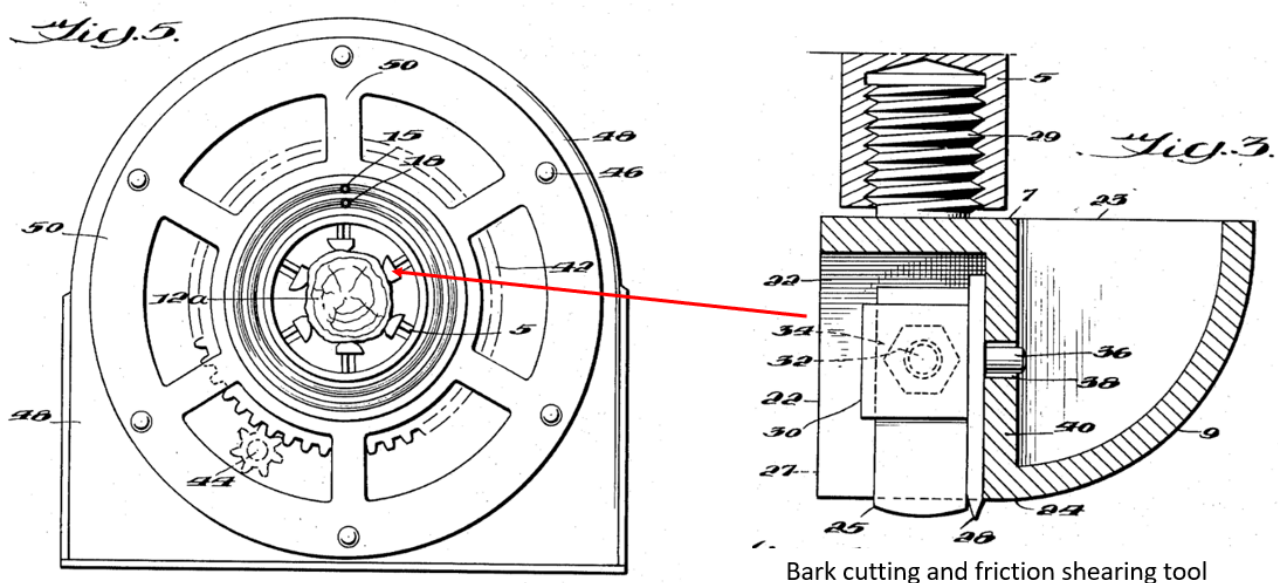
Machine for removing bark from logs (left) and bark cutting (28 on drawing) and friction shearing tool (25 on drawing) tool (right).
